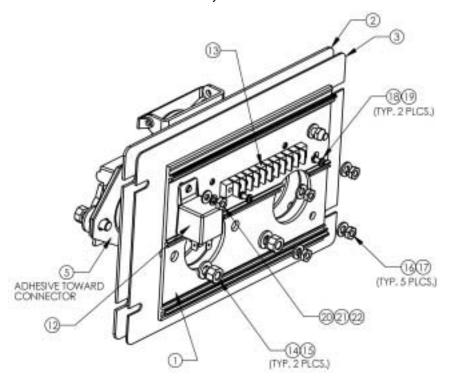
0N10-1037-00 Module Face Plate Sub-Assembly, Back side
